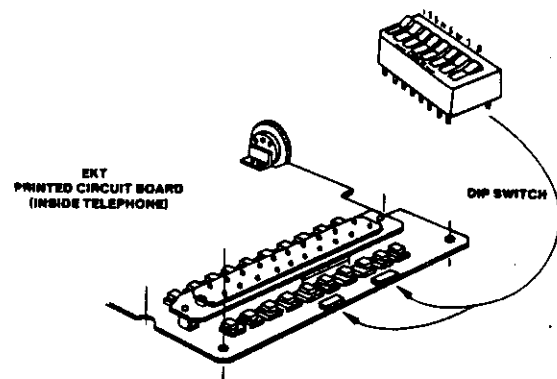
LOCATION OF DIP SWITCHES ON EKT PCB
